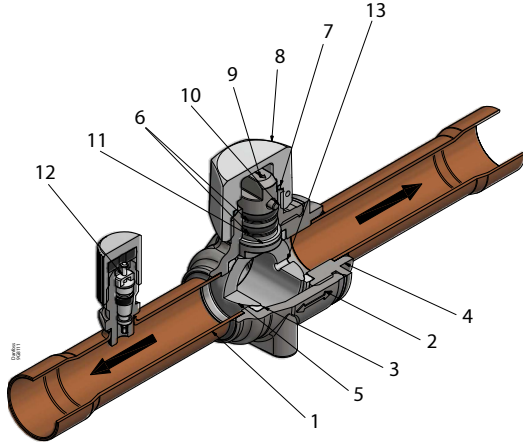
42s with partial Cu-plated stainless steel tube
